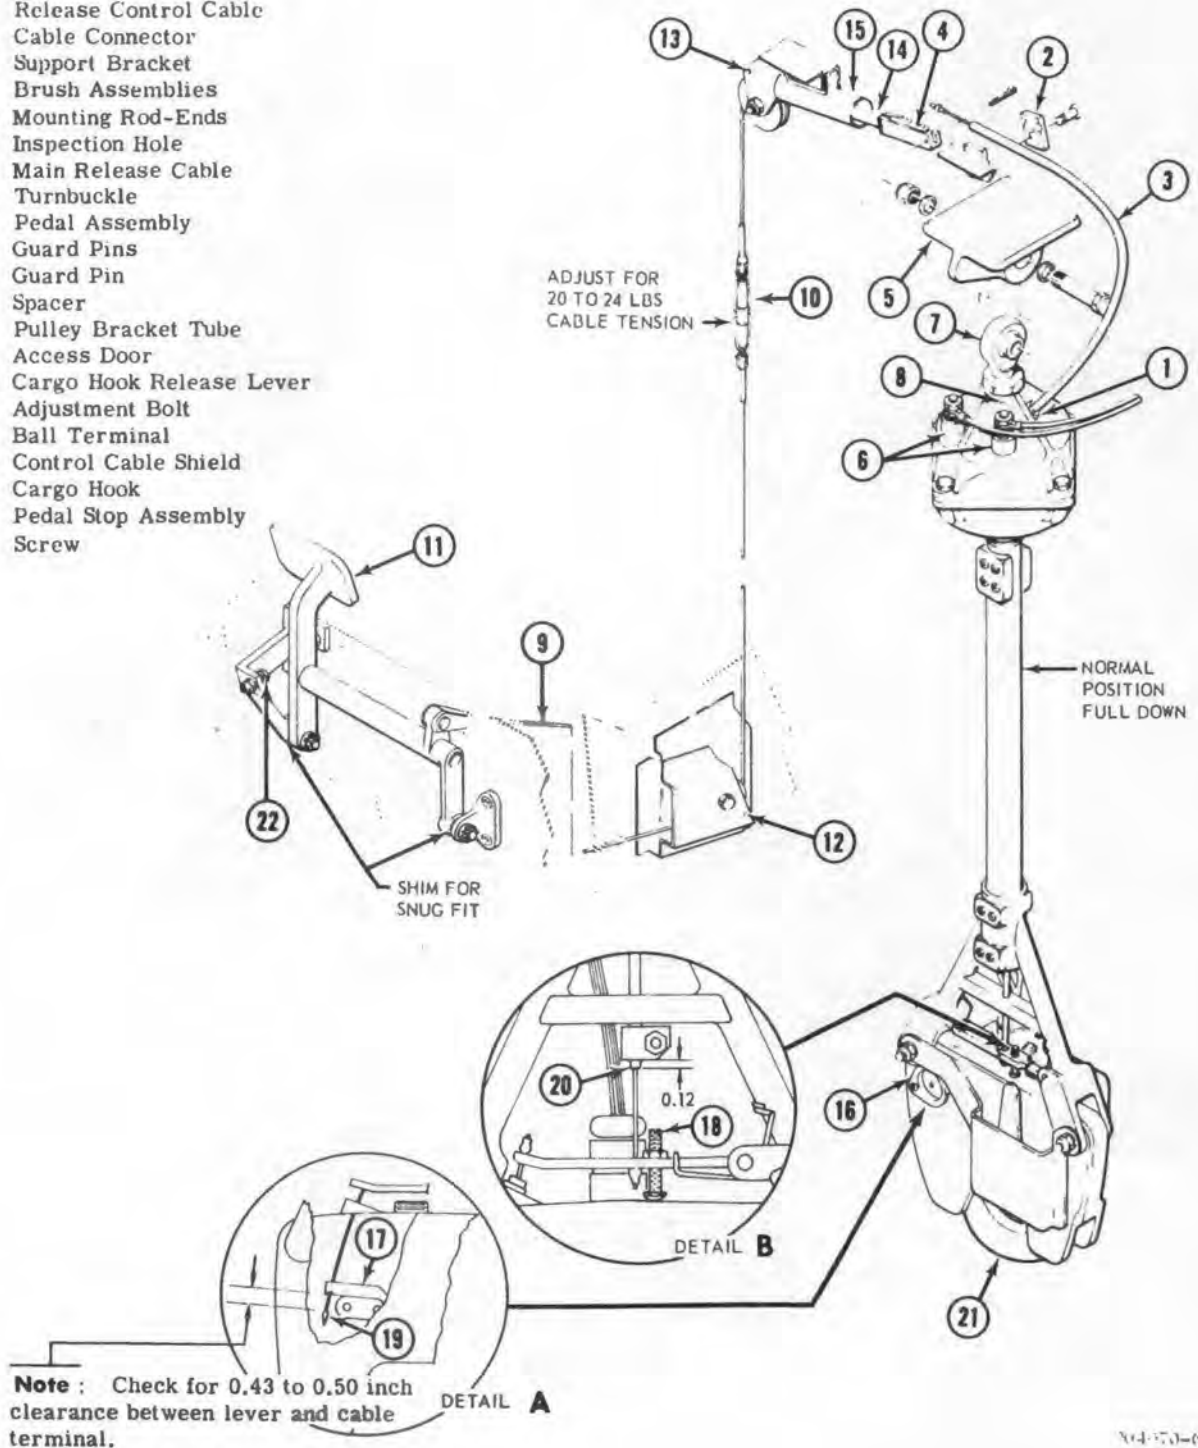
UH-1B Helicopter cargo suspension (Serial No. 60-3546 thru 60-3619)
